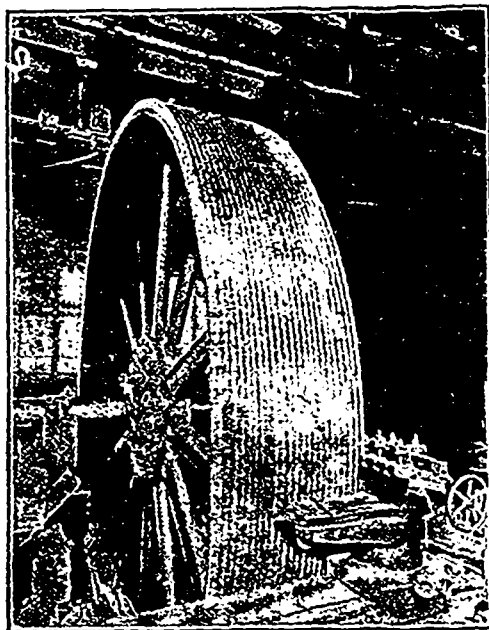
ENORMOUS ROPE PULLEY SHOWING GROOVES. MADE BY LAURIE ENGINE & MACHINE CO., MONTREAL.
